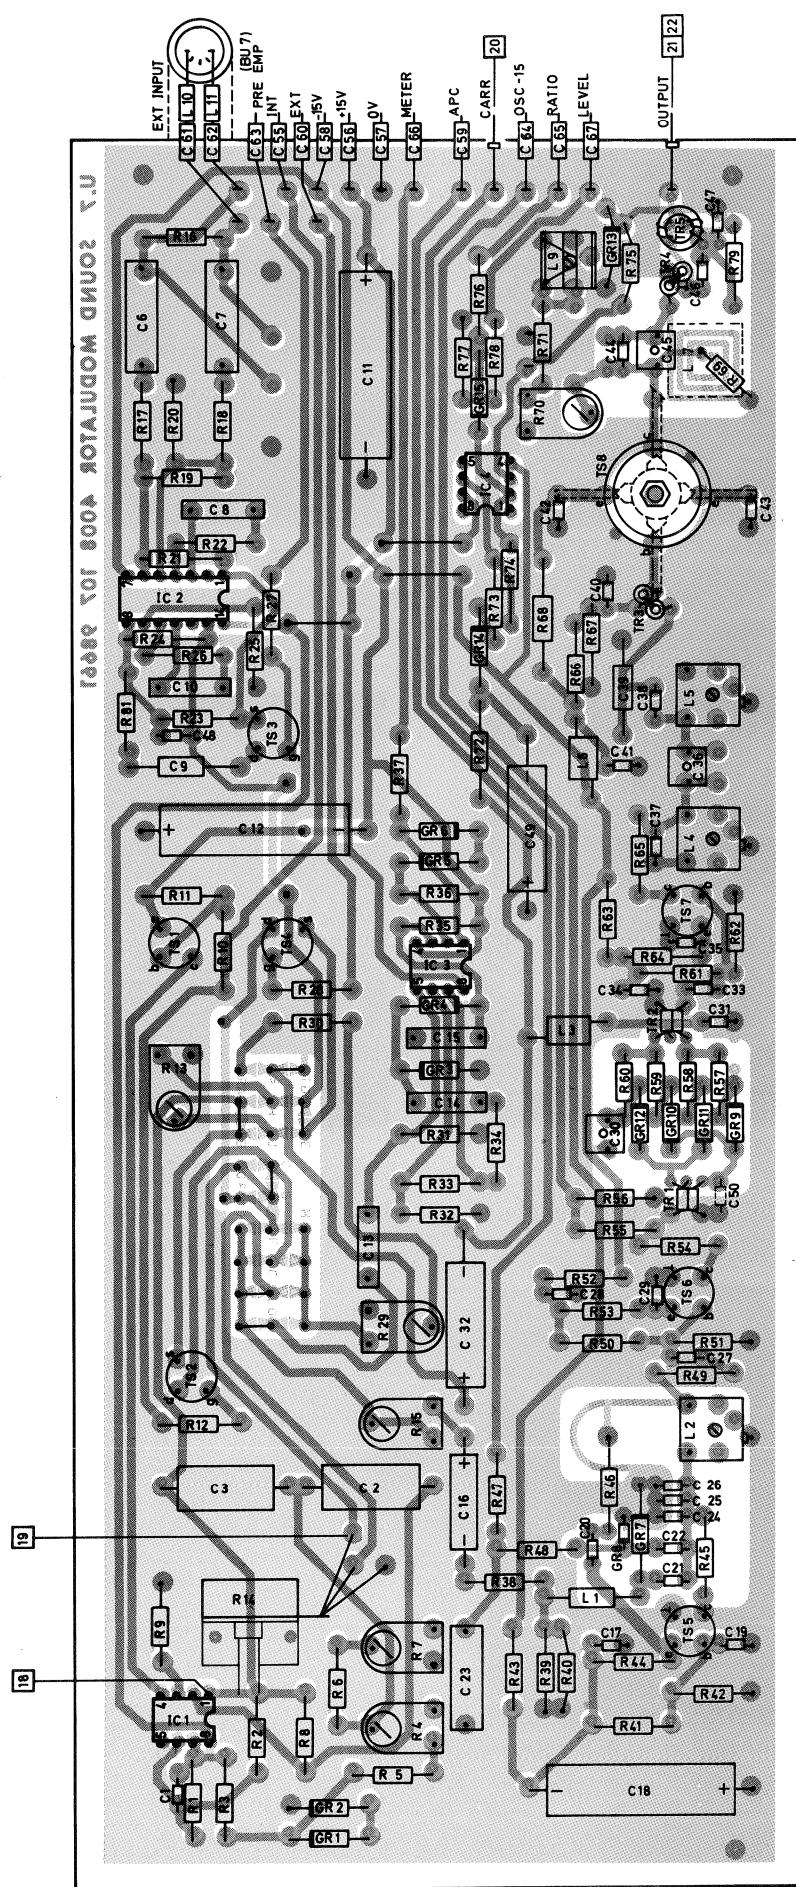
Printed wiring board, sound modulator, unit 7
